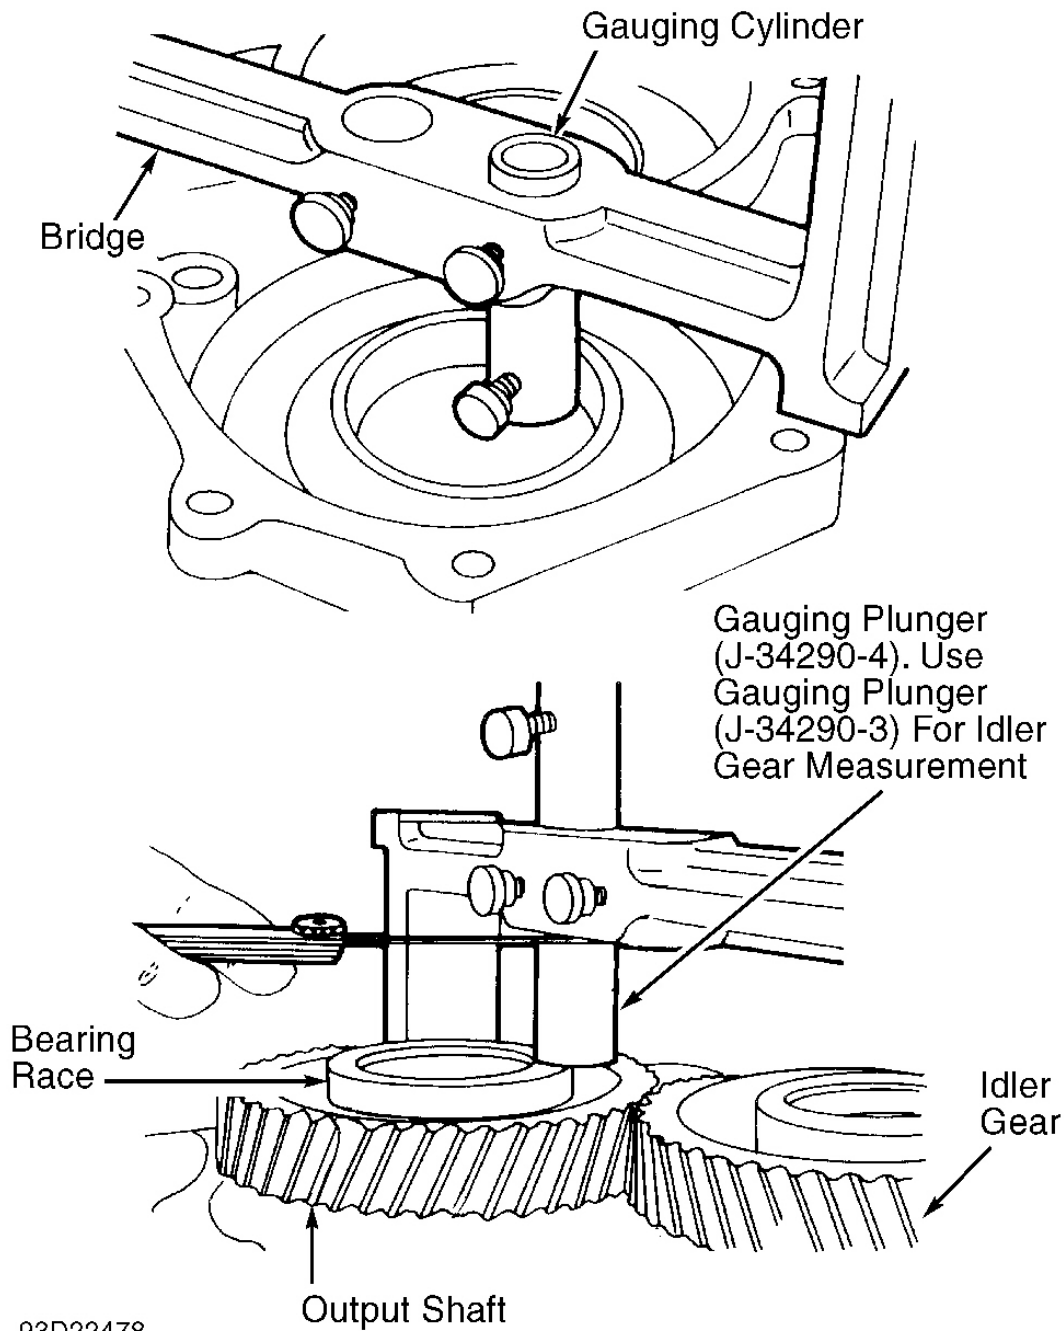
Measuring Output Shaft & Idler Gear Preload
